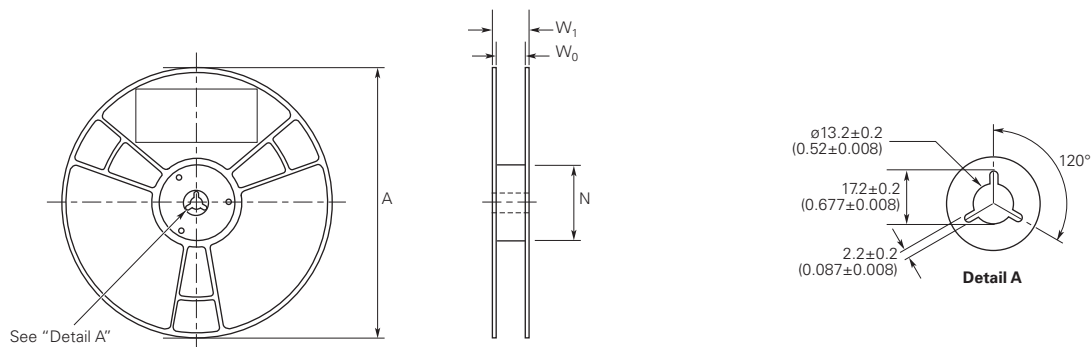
EIA Referenced Taped Component Dimensions for FT600 Devices
